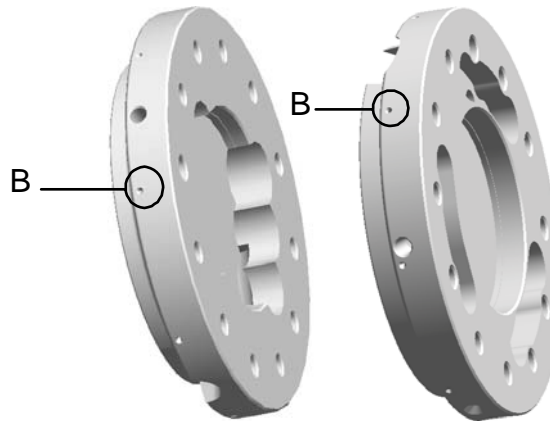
Seven holes (B) on a radius of x mm from axis 6 center on the two insulated tool flanges.
